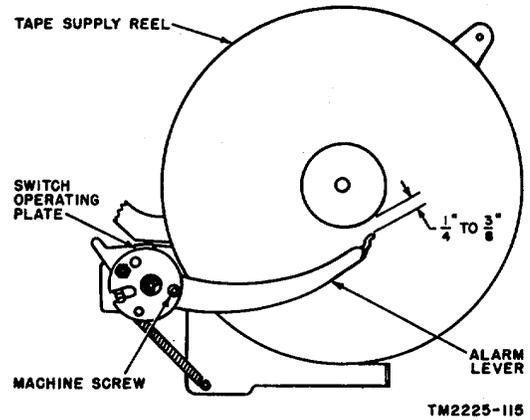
Alarm lever adjustment (TT-76A/GGC and later models).
